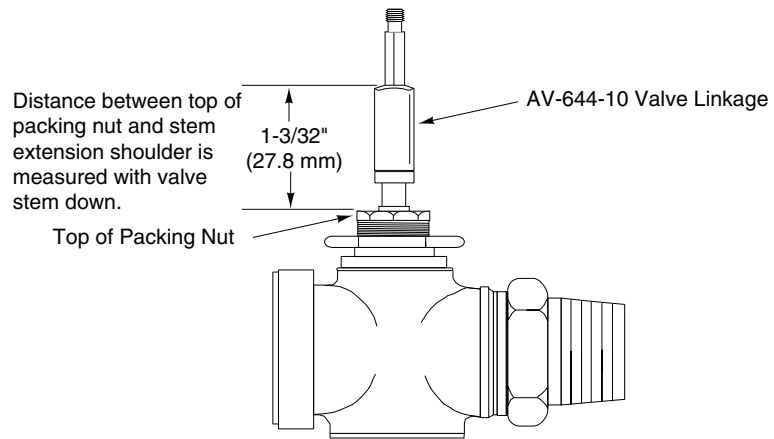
Stem Dimension Requirements for MF-221xx Series Actuators.
